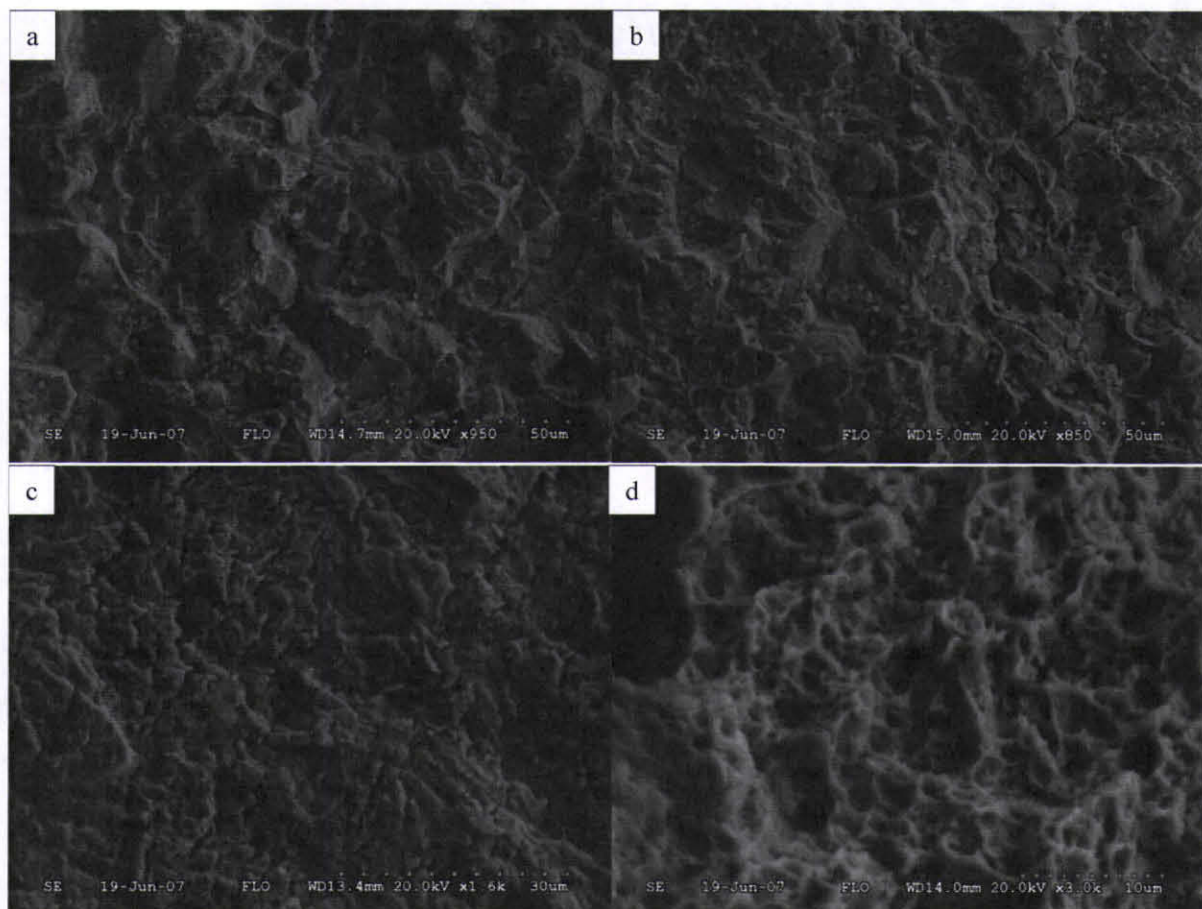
Representative picture of fracture surface as observed in SEM for bolt 6.
